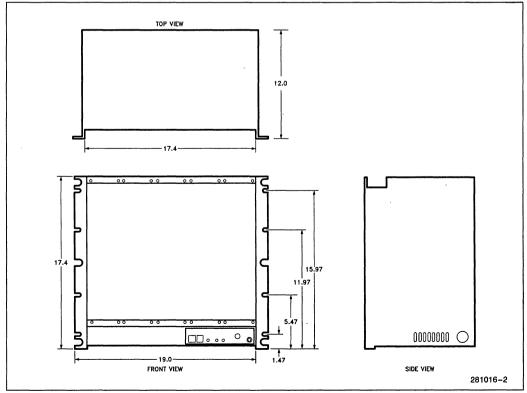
iCS™ 80 Chassis Dimensions 13-19
